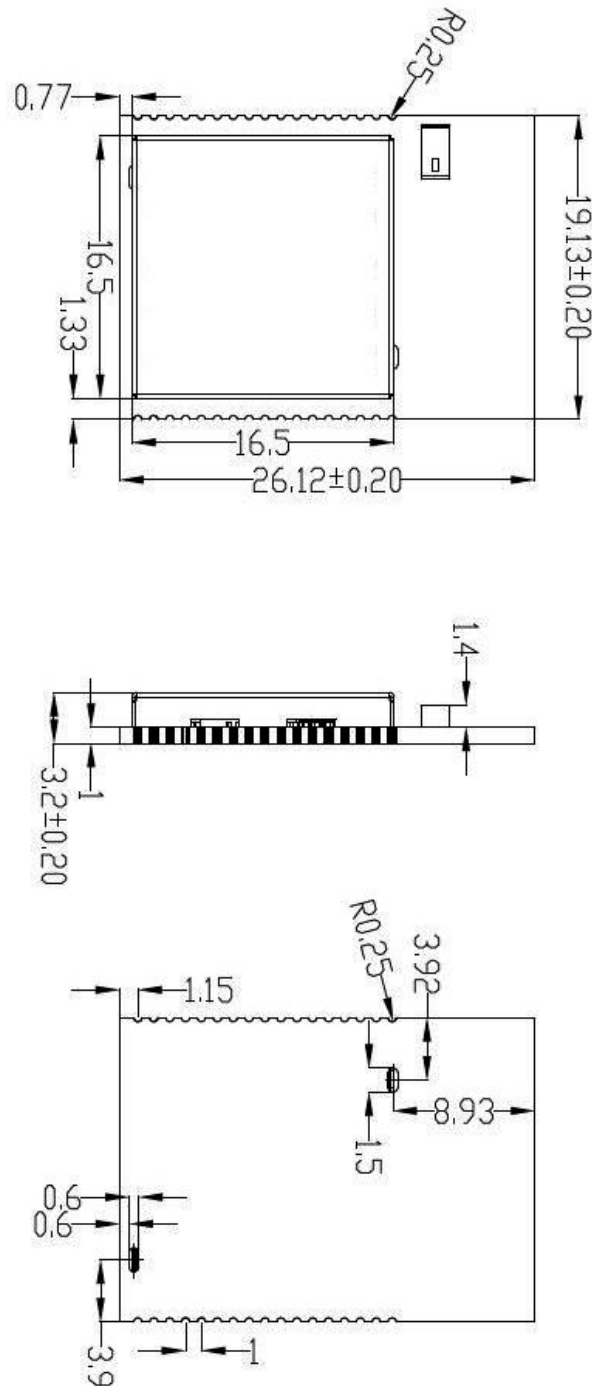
SKU609 PCB Footprint and Dimensions(units: mm)
